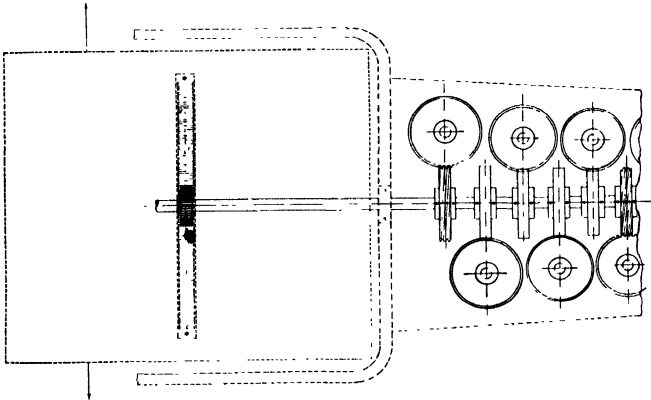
Helical gear drive of the Riverbank synthesizer
